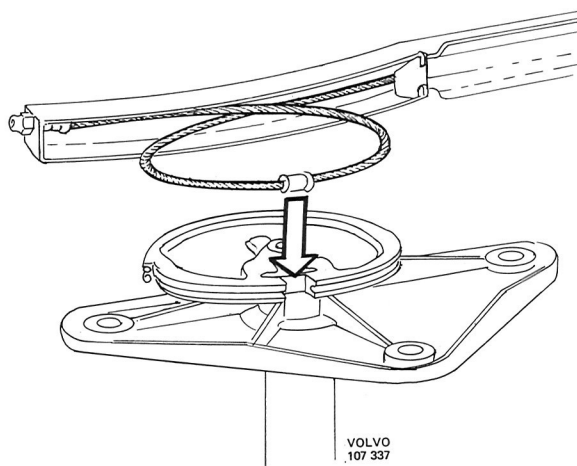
Installing cable for drive link and parallel drive link, left-hand side
